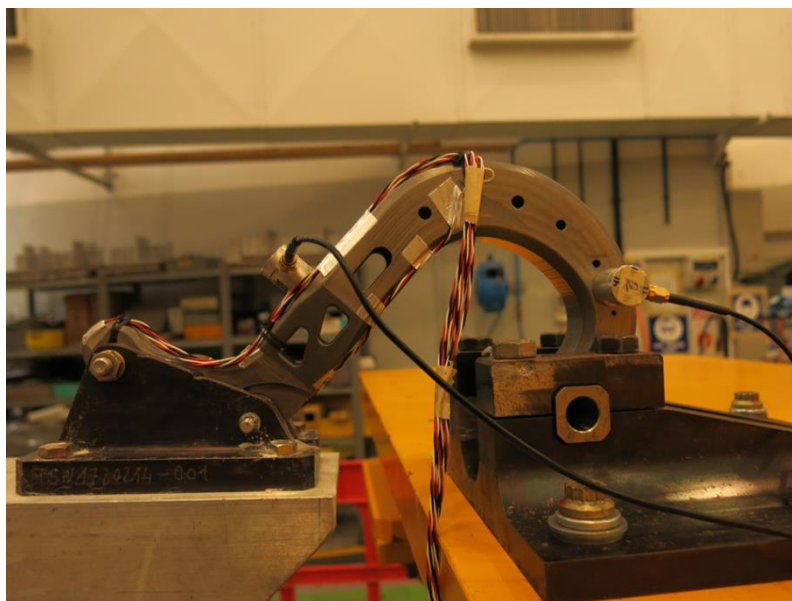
IAI improved Specimen Demonstrator Attached to the Test Fixture
